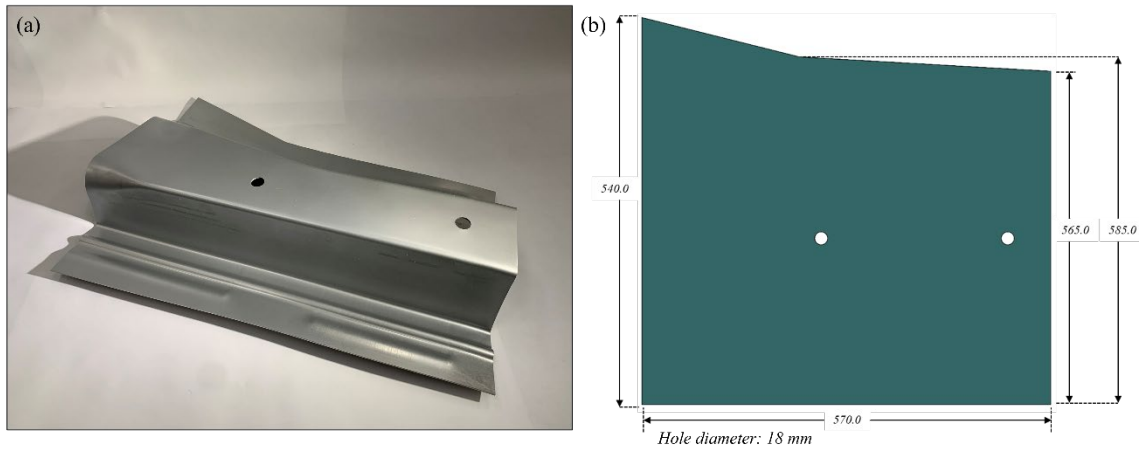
(a) Isometric view of U-shaped rail formed using 2 mm AA6xxx-T4 and (b) blank geometry used to form U-shaped rail. All dimensions in mm.
